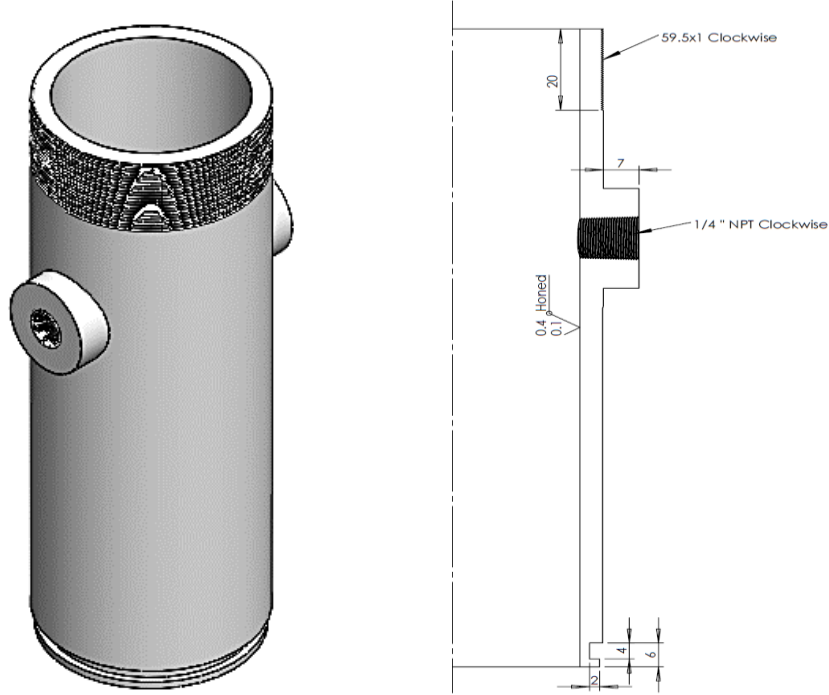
Isometric representation of the designed piston sleeve, with some dimensions
